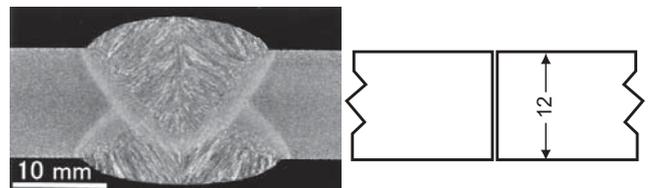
Macroscopic profiles of G-60 / US-36 in a double-side single-pass weld (12-mm thick mild steel base metal; I-butt joint; 4.8-mmØ wire; 700A-36V-550 mm/min. for 1st pass; 800A-38V-550 mm/min. for 2nd pass).
